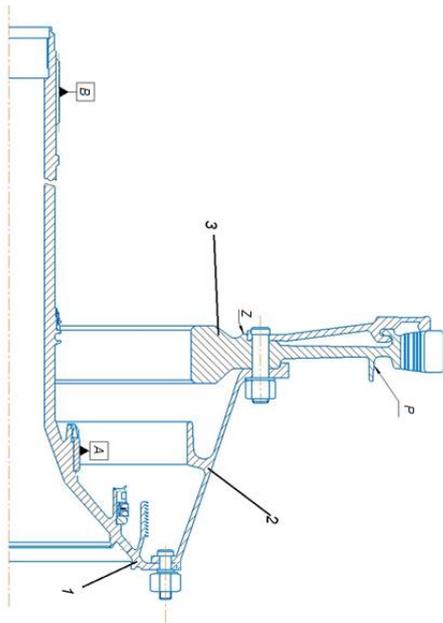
Assembly unit and controlled surfaces, 1 – shaft, 2 – retainer, 3 – disc.
